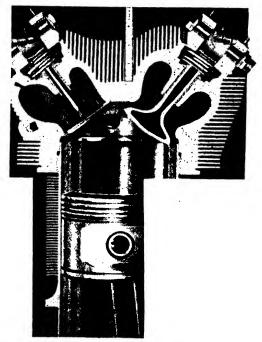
WRIGHT "CYCLONE" ALUMINIUM ALLOY CYLINDER HEAD
